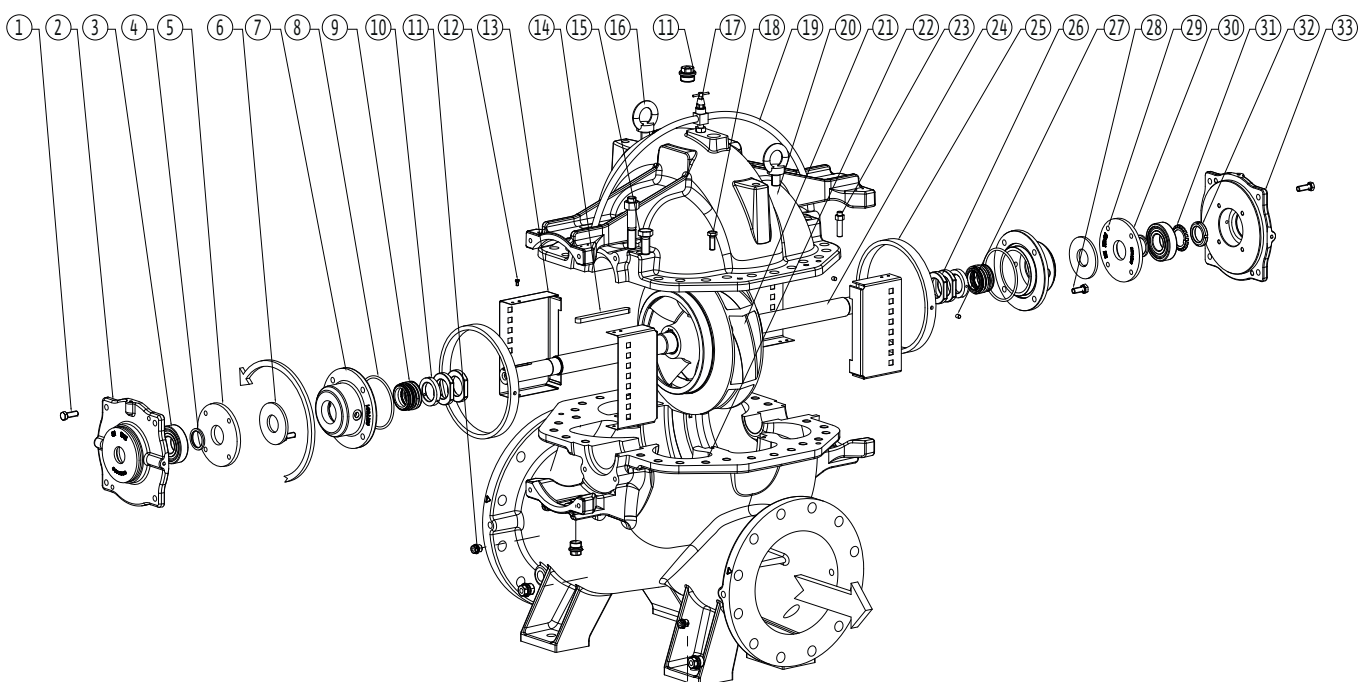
Exploded view of Atmos TERA-SCH hydraulic (mechanical seal version without sleeves)
